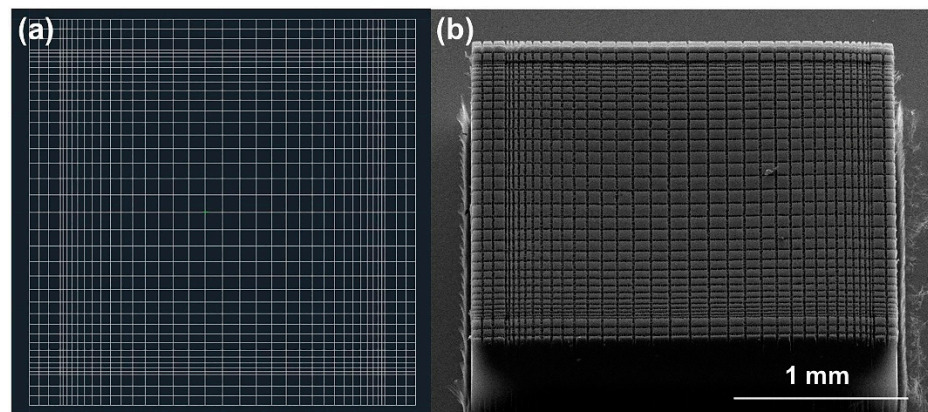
(a) CAD drawings for machining and (b) corresponding processed shape.
